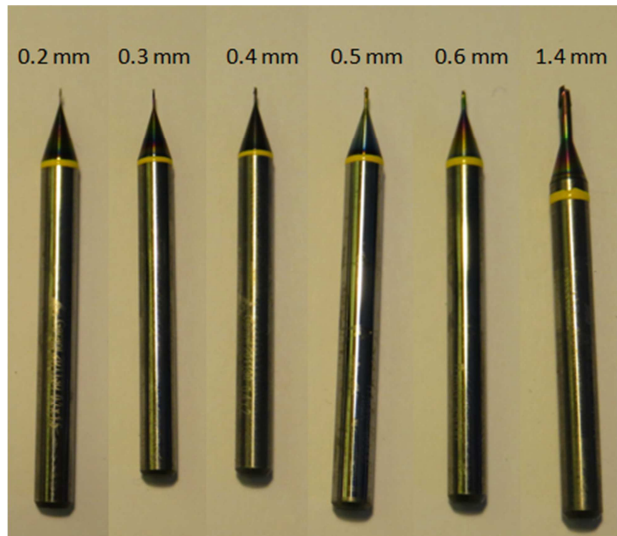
Milling cutters used throughout this work for ZP fabrication. The diameter of each cutter is indicated.
